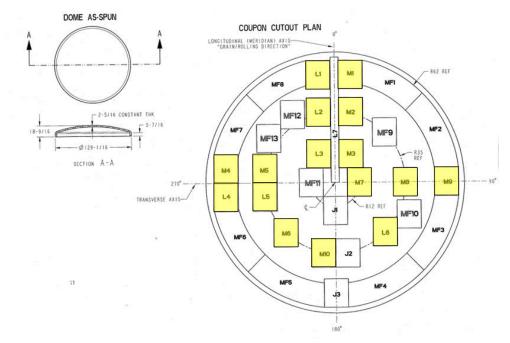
Aft Bulkhead Cut Plan Showing the Location of the Tensile Coupon Blanks highlighted in Yellow
